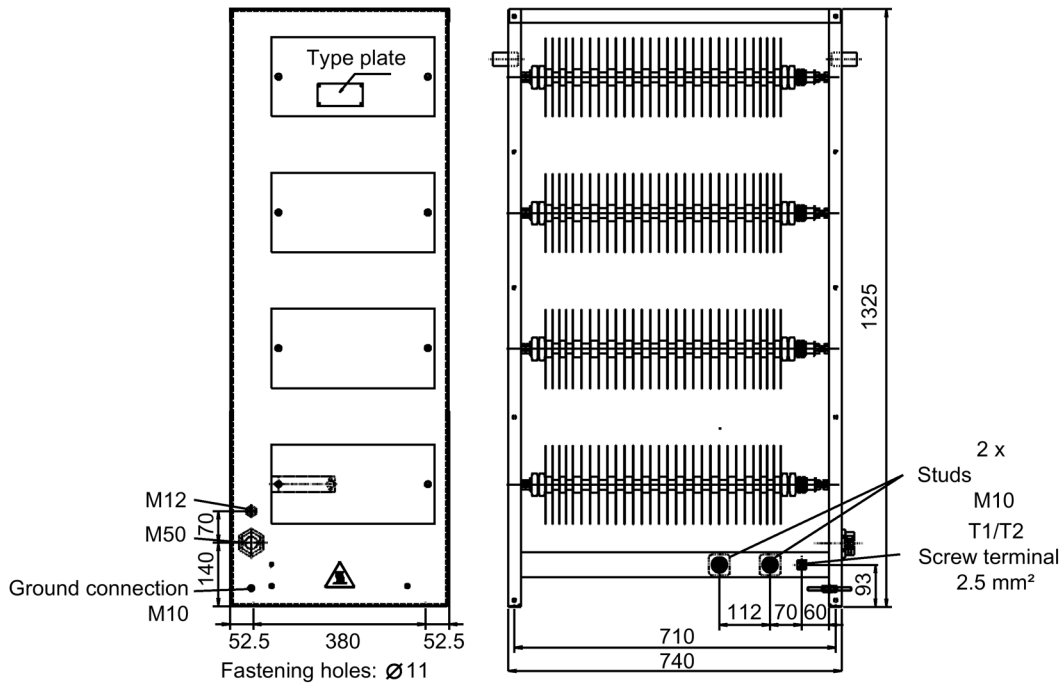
Dimension drawing for braking resistor (50 kW)
